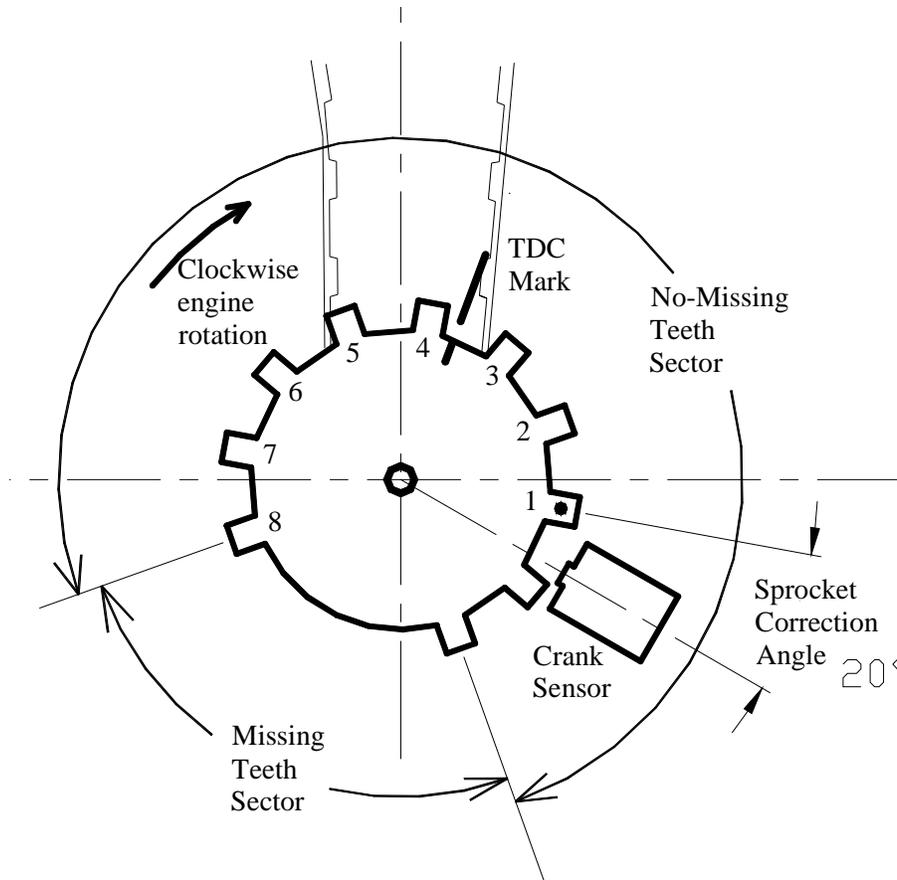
Case 2A, Determination of Sprocket Correction Angle and Last Non-Missing Tooth on Crank Sprocket
